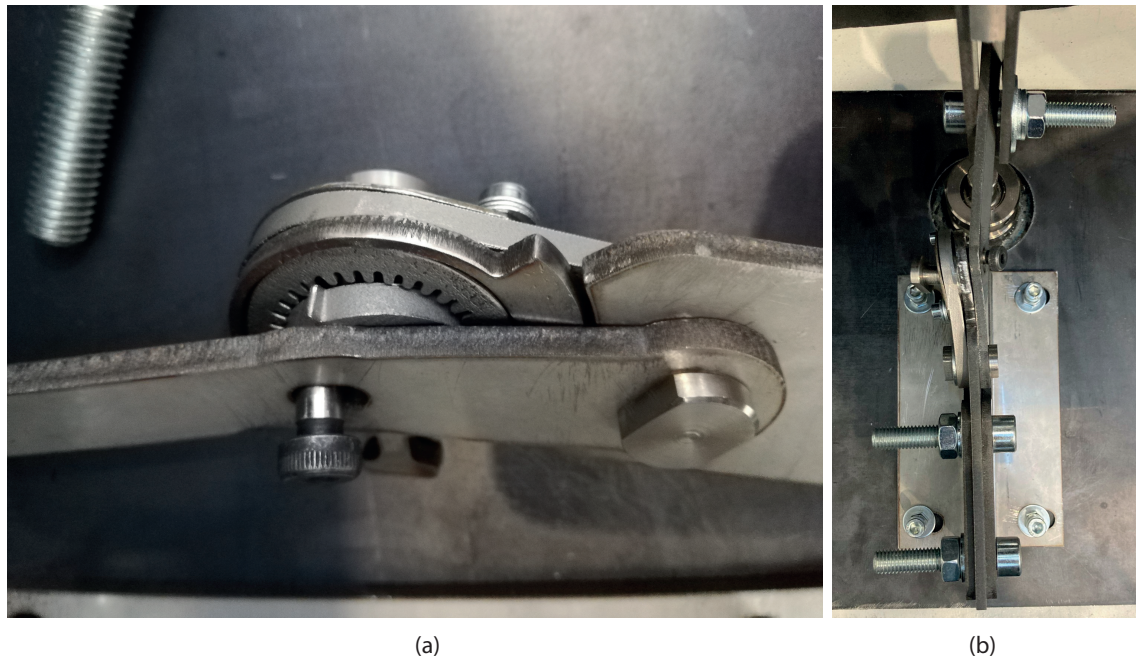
Mechanism after failure: (a) the gear came out of the housing of the mechanism (b) top view after pull to failure test. The teeth of the gear were deformed and the housing and upper bar were slightly twisted and bend.
